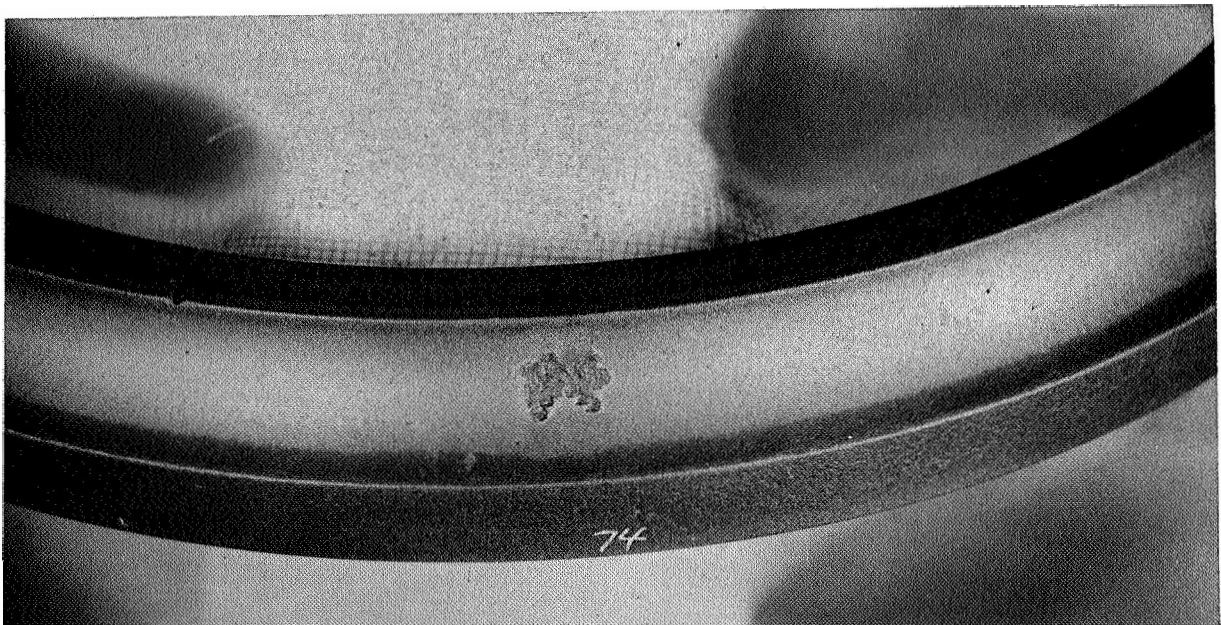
BEARING S/N 81. FATIGUE FAILURE ON OUTER RING
